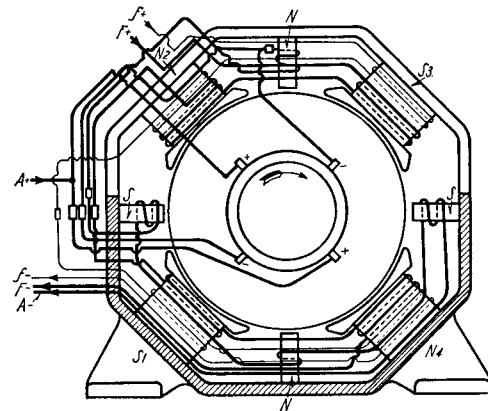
Type MCO Motor Frames 90, 100 and 103 with Two-Circuit Armature
